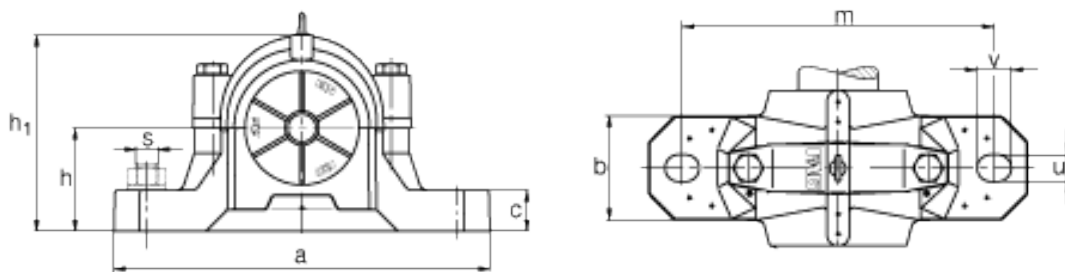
Dimensions of the FAG SNV250-F-L bearing housing
